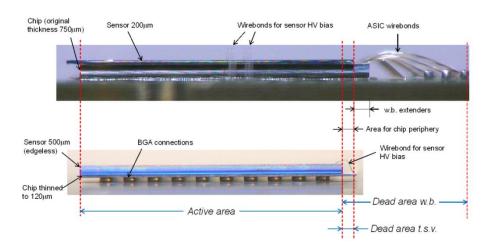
Lateral view of the Medipix3RX on chipboard (Top). The bottom view shows the Medipix3RX chip after TSV processing and connecting to the chipboard using BGA [13].
